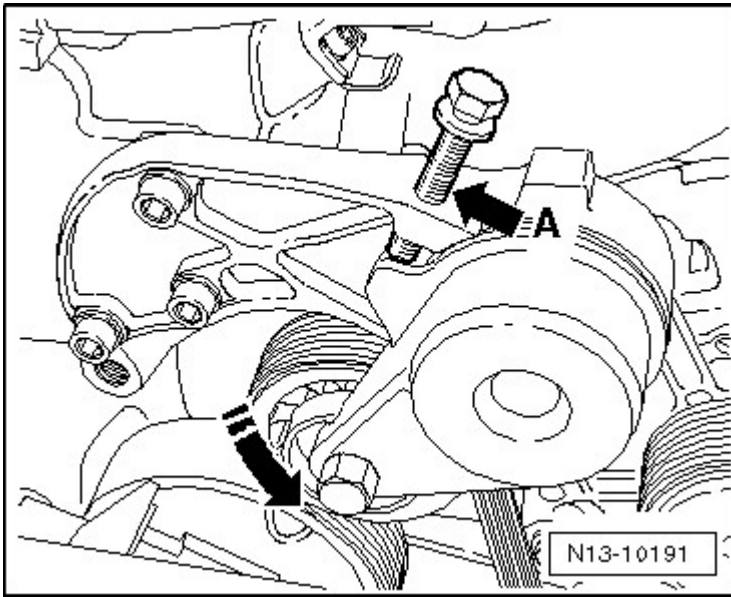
Identifying M8x50 Bolt In Threaded Hole
